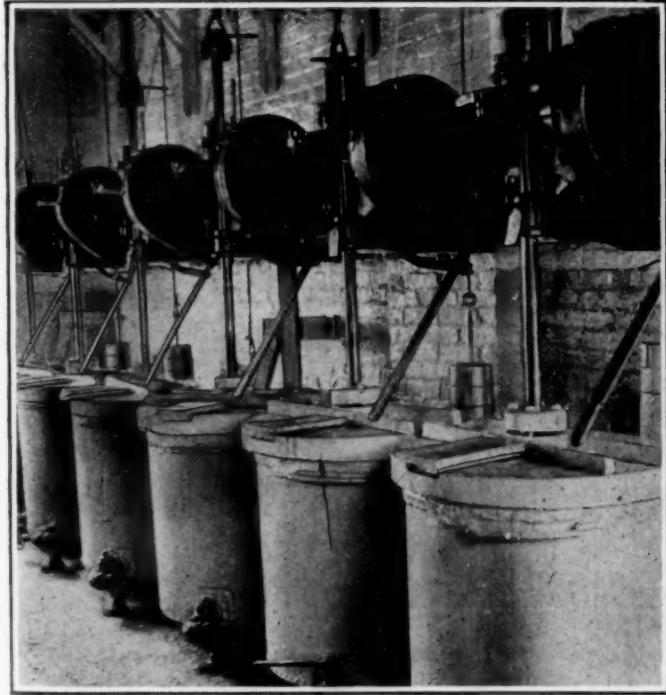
A Battery of Day Mixers in the Enamel Plant
